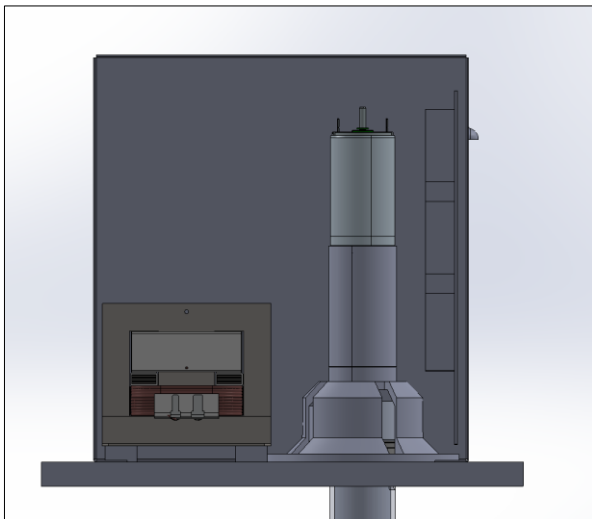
Electrical Cabinet Layout. Transformer on Left and PCB motherboard mounted on Right Sidewall. PCB was approximated with model to increase load times of Top-Level Assembly.
